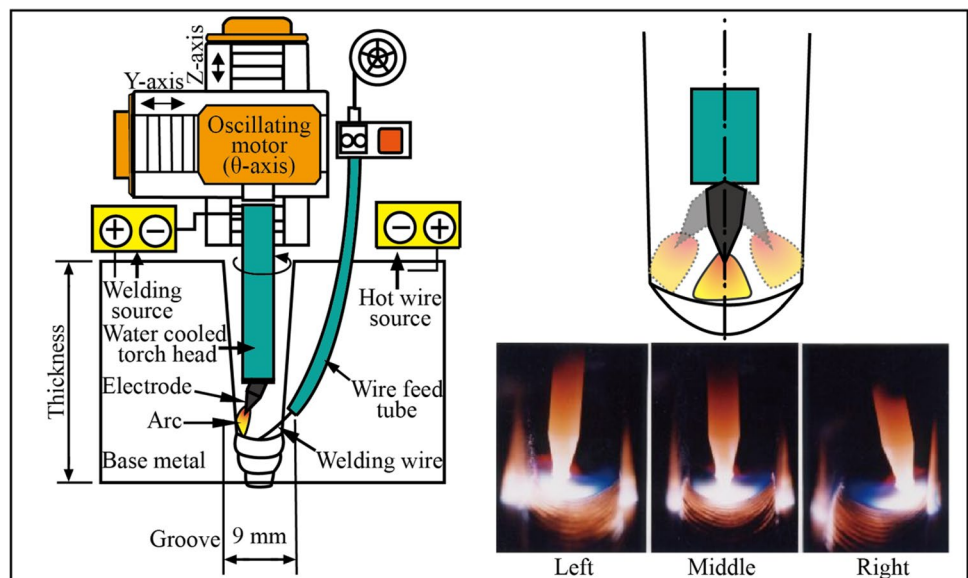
Schematic diagram of inclined tungsten electrode narrow gap TIG welding and physical drawing of weld seam formation [23]
